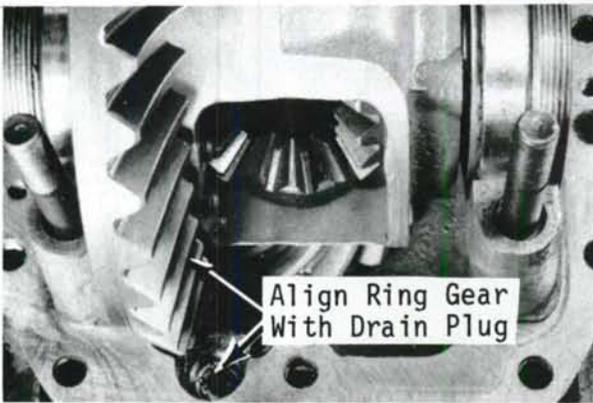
When installing differential unit in carrier housing, make certain ring gear is on same side as housing drain plug.
